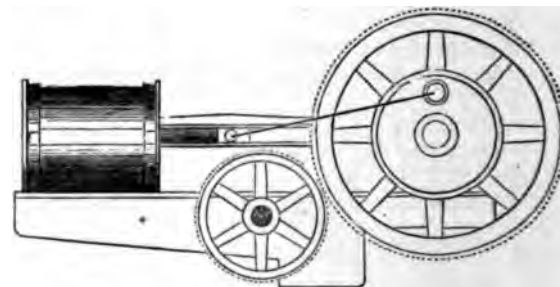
Horizontal Cylinder Screw-engines, Geared.
